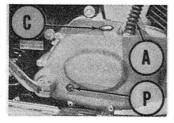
View of right side showing location of gear box oil filler cap (C), oil level plug (P) and clutch adjuster (A).
